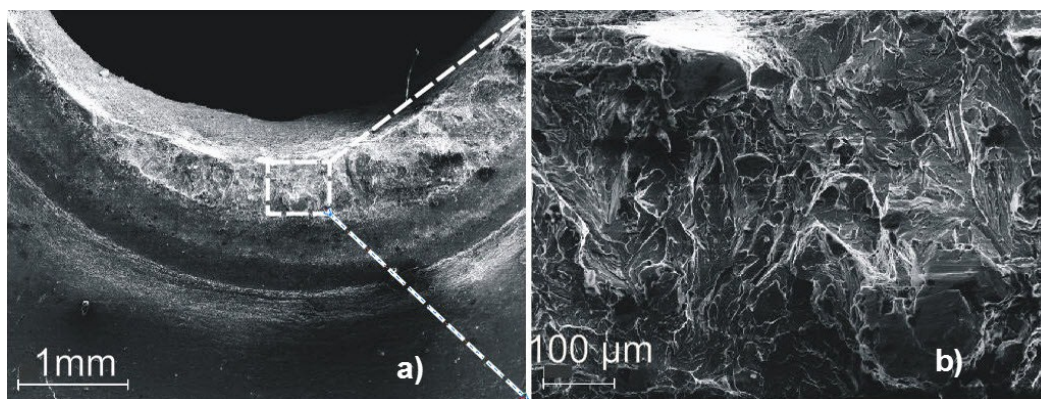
(a) Fracture surface of the resistance spot welded DP600 steel after cross-tensile test; (b) detailed appearance of the fracture surface shown in (a).
